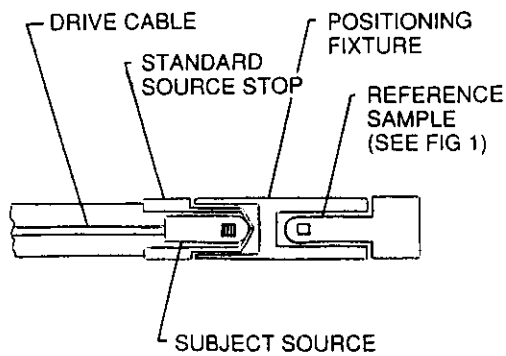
TYPICAL ARRANGEMENT USING A STANDARD GUIDE TUBE AND SPECIAL POSITIONING FIXTURE
